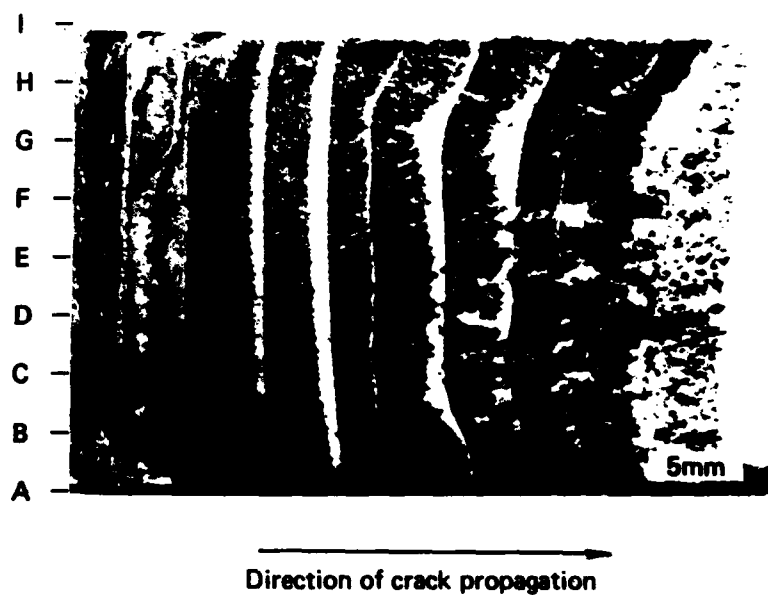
FRACTURE SURFACE OF 1-T WOL SPECIMEN WITH  $B/B_N = 1.1$  WHICH HAS BEEN ALTERNATELY FATIGUED AND STRESS-CORRODED
